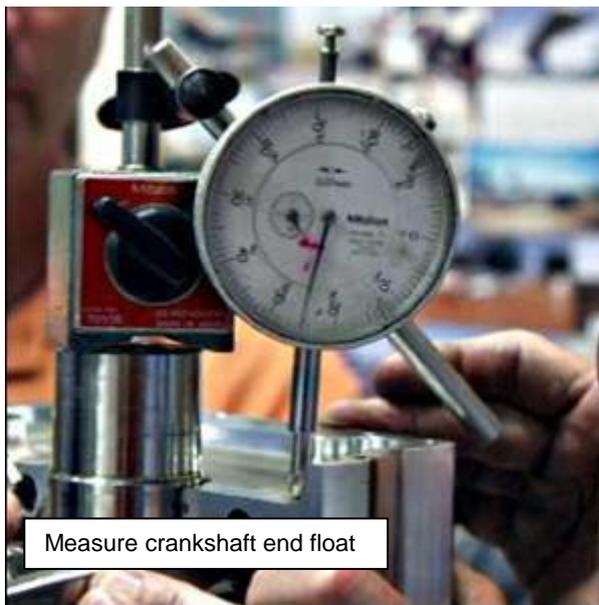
Checking Crankshaft End Float, Installing Solid Lifters
